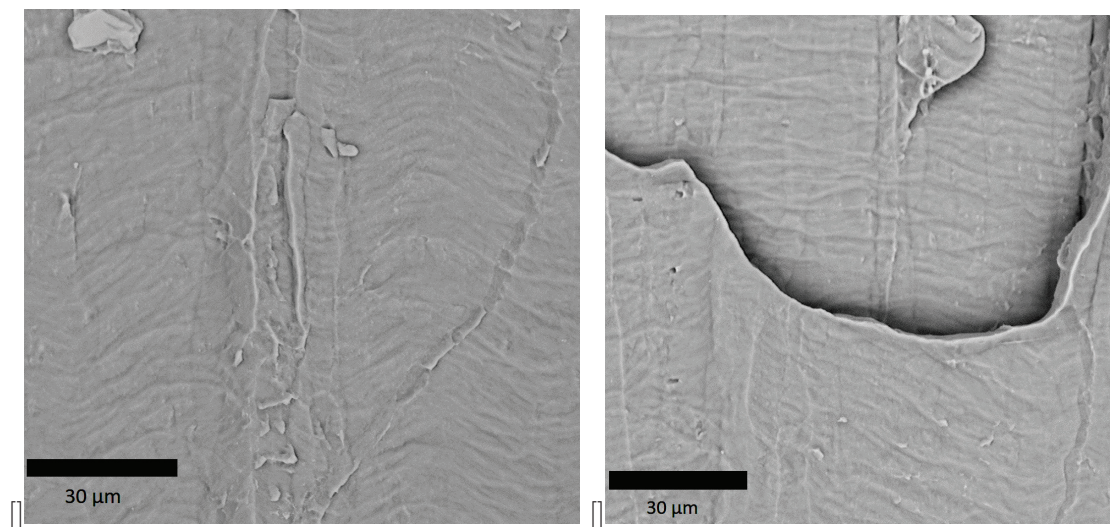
SEM images of the fracture surface of SCC test in humid air showing a transgranular fracture with fine lines.
